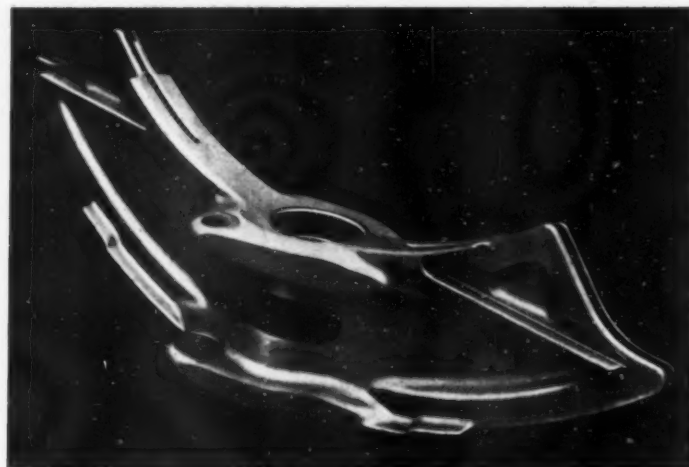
Stamping for a spar frame, in "Hiduminium" R.R. 77. The finished weight is 74 lb. and overall length 43 in.
